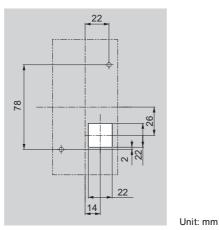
Panel Cut-Out Dimensions (External/Face-Mount Installation)
